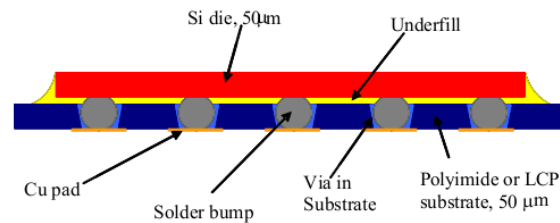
Illustration of polyimide or LCP substrate and solder assembly approach [128]
